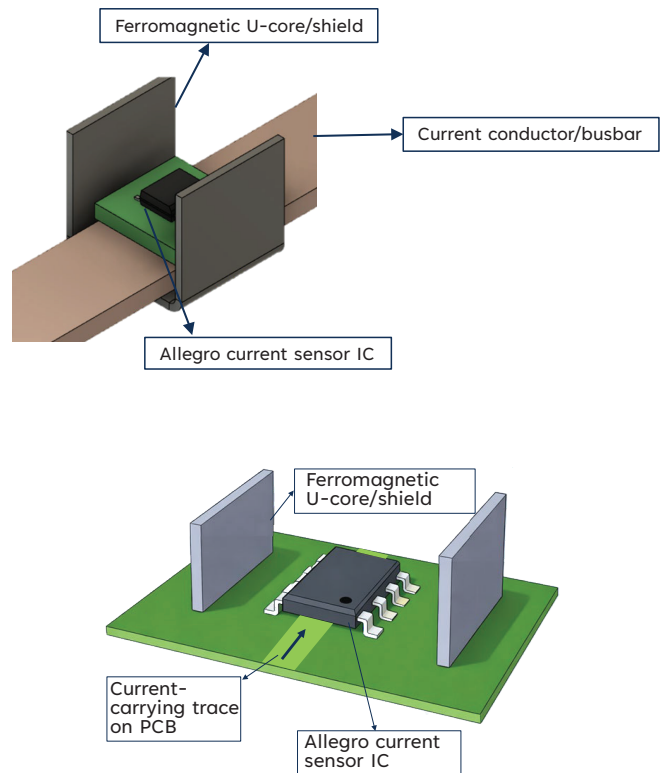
U-Core Assembly Example with Busbar or PCB Trace
